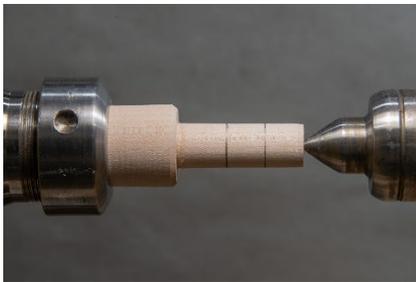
Remount the blank in a collet chuck and turn all but 1" to 5/8" diameter.
